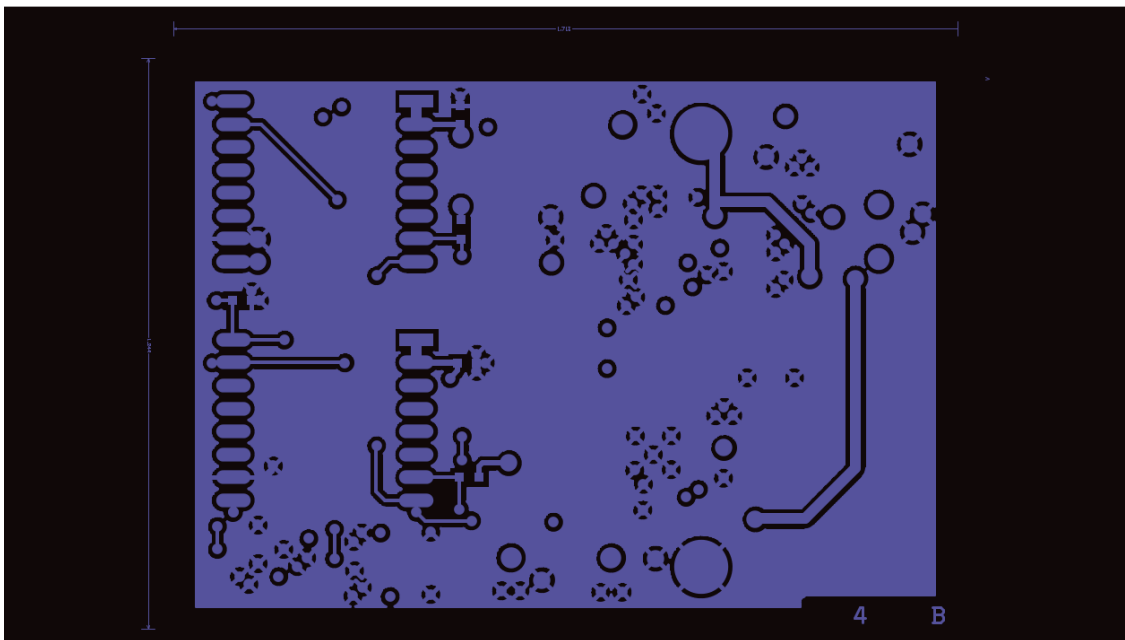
Accelerometer/gyrometer: PCB bottom layer.
